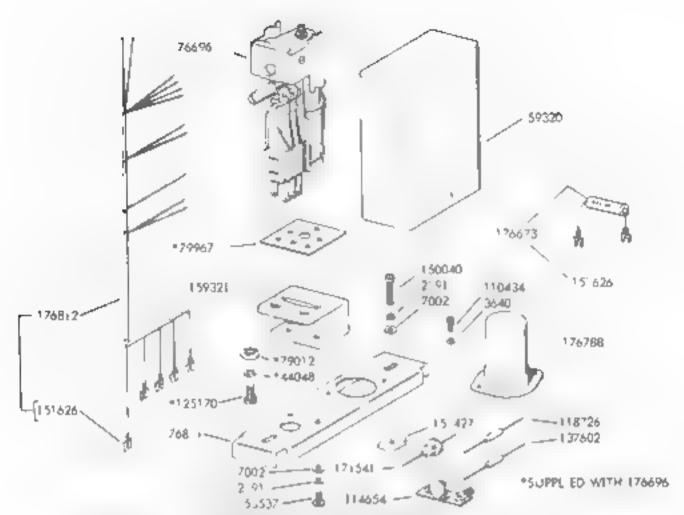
176810 ANSWER-BACK CONTROL RELAY ASSEMBLY
